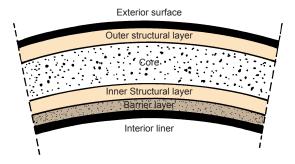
Typical cross section of FLOWTITE™ Pipe wall
